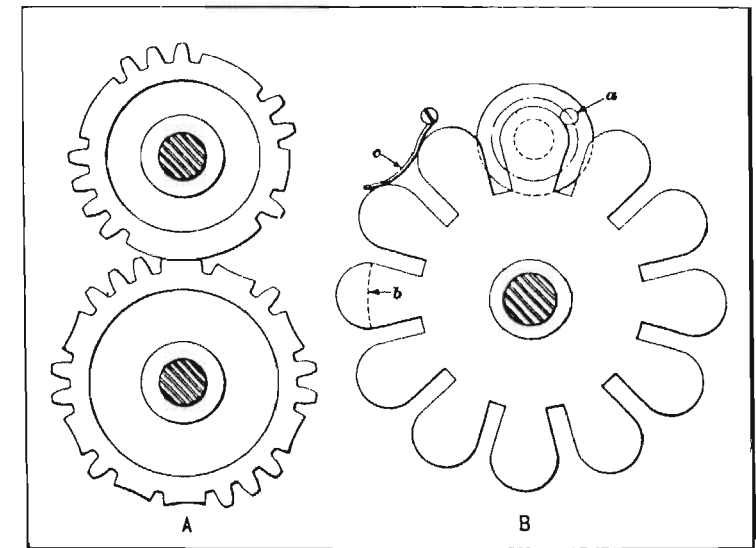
(A) Gearing for Variable Intermittent Motion; (B) High-speed Intermittent Gearing
